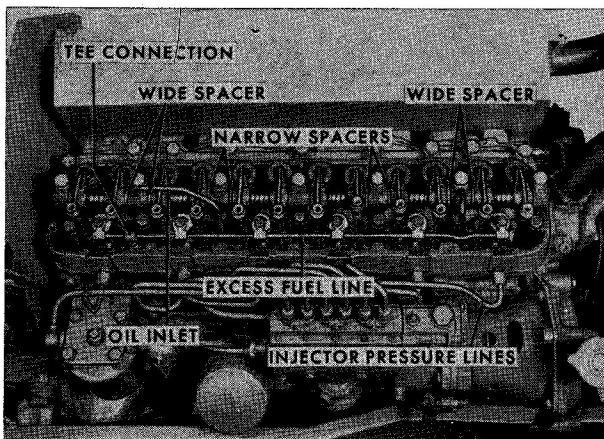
When reassembling rocker arm assembly on diesel engines be sure spacers are located as shown.
